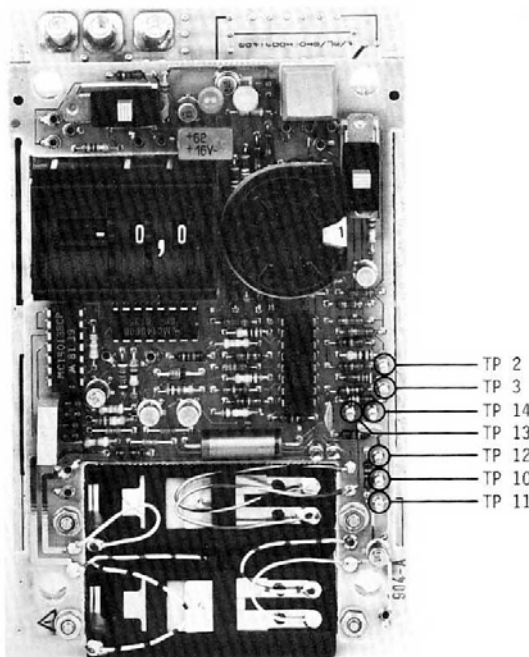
"Sweep generator" p.c.b. [904-A]
